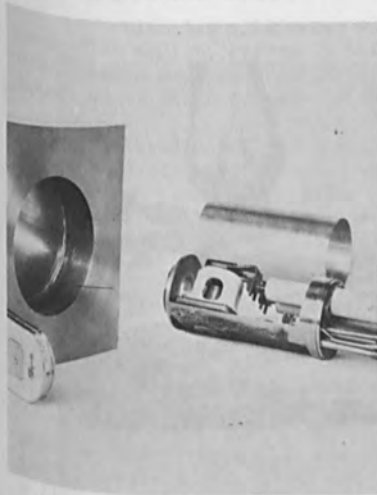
Electron gun for bore welding and test-piece. Fig. 4 : Portable E.B. welding machine for nozzles.
